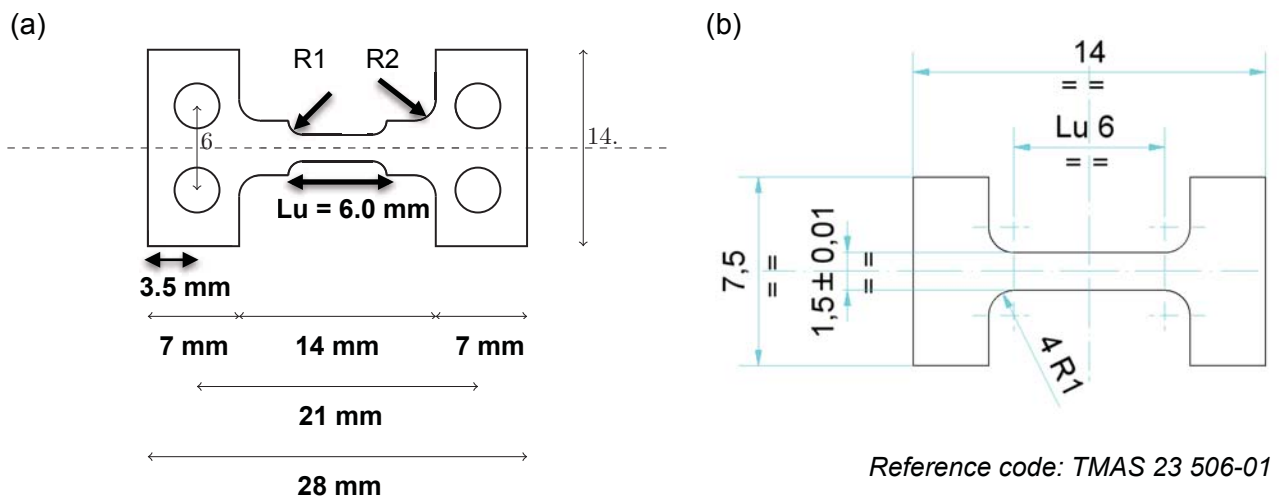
Tensile specimen machined for (a) *in situ* and (b) *ex situ* mechanical testing.
